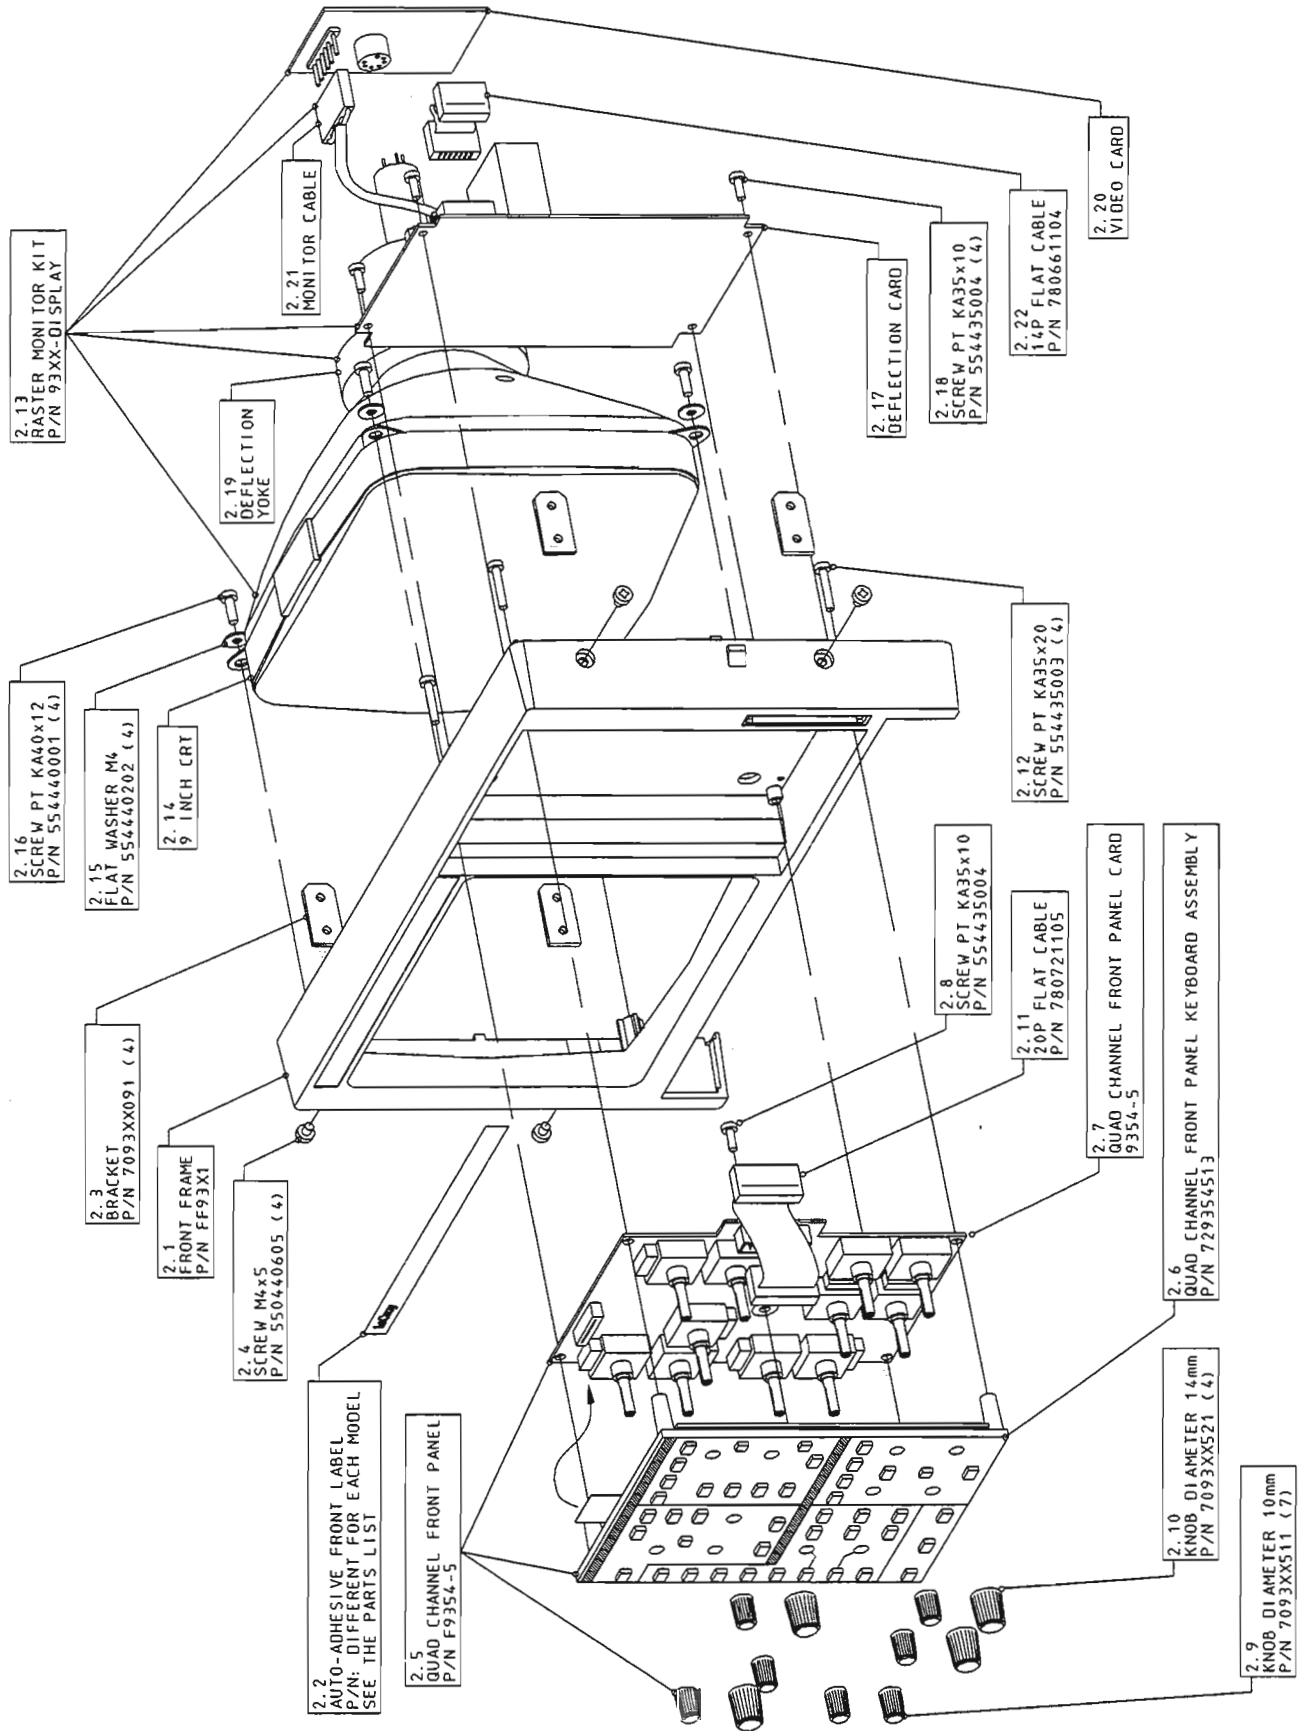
9374/M/L/TM Front Frame Assembly
